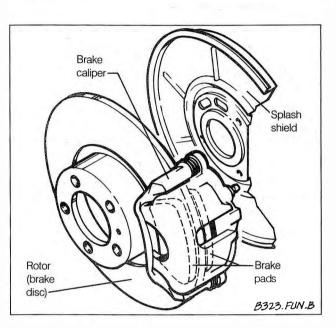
Disc brake assembly showing disc, caliper, and splash shield. Caliper assembly holds pads with friction material.
